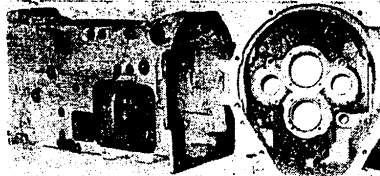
The Z 16045 tractor transmission's housing and auxiliary housing, machined on the CU-9 machining center.
